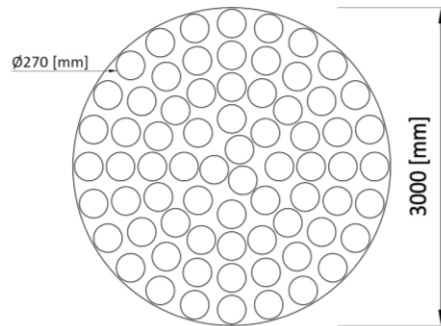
Top view with the pattern of the 71 extension springs inside a 3 [m] storage shaft
